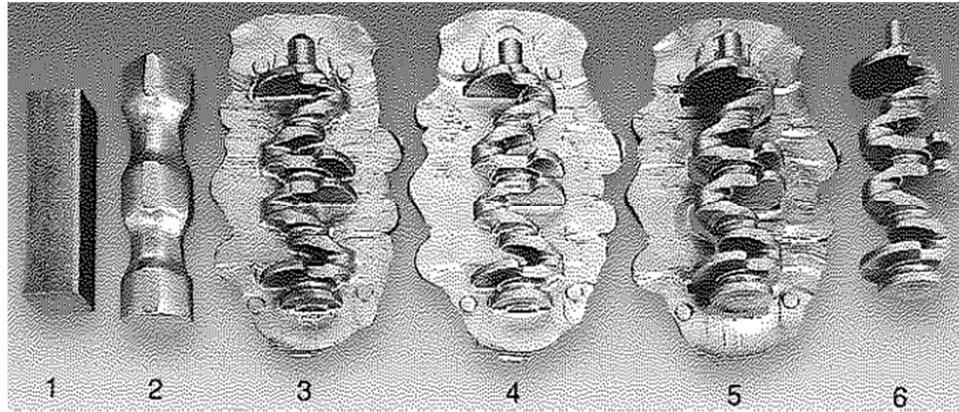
Forming steps of a four-cylinder automobile crankshaft; 1-Billet, 2- Rolling, 3-Preforming, 4-Finishing, 5-Clipping, 6-Calibration [45].
